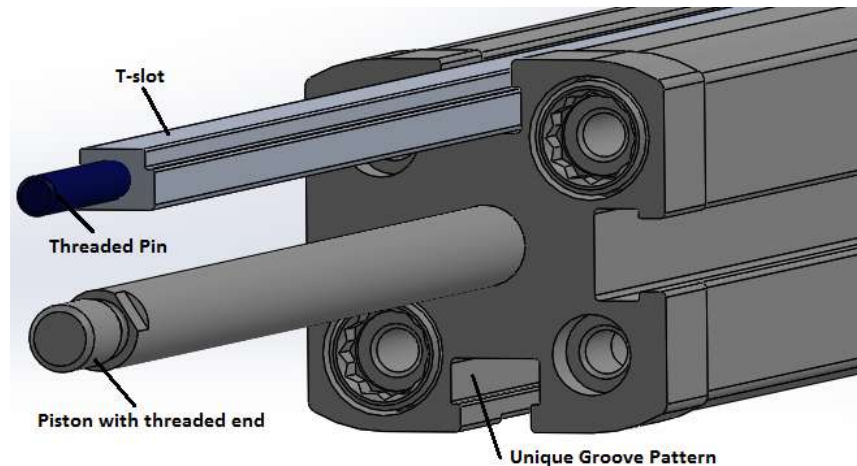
CAD model of T-slot Guide Rod on Linear Actuator
